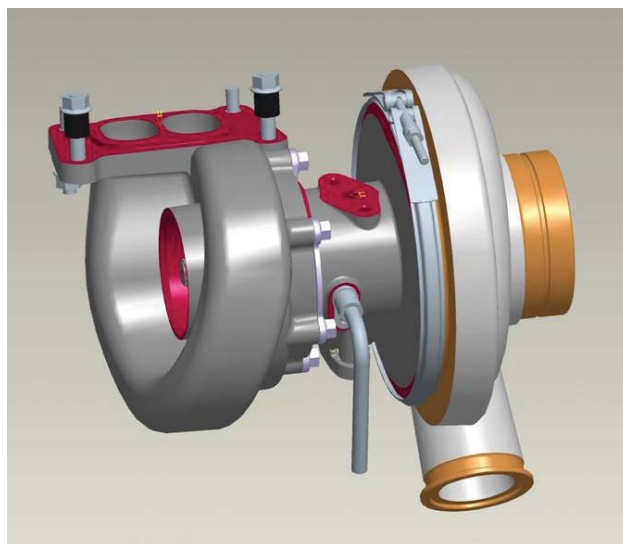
Computer Aided Design Drawing of the Turbocharger Unit
